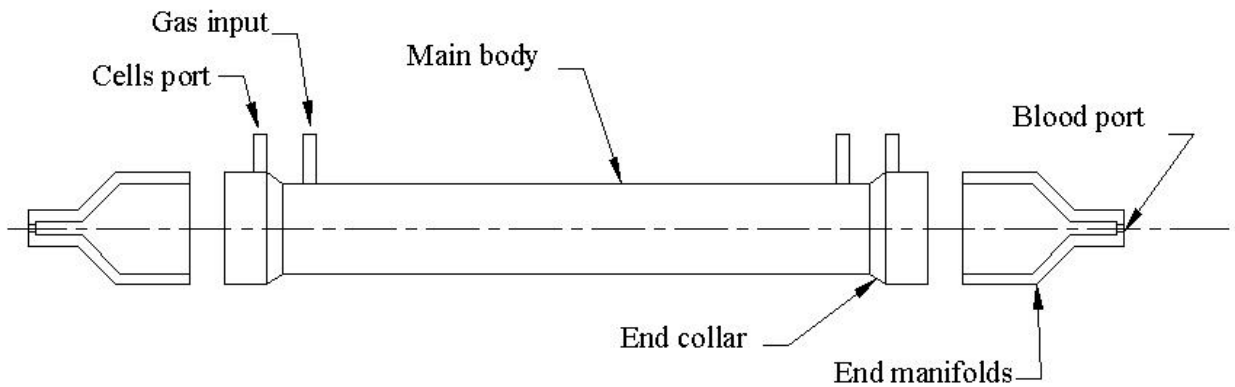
2D CAD design of component assembly of the initial FIF bioreactor design.
